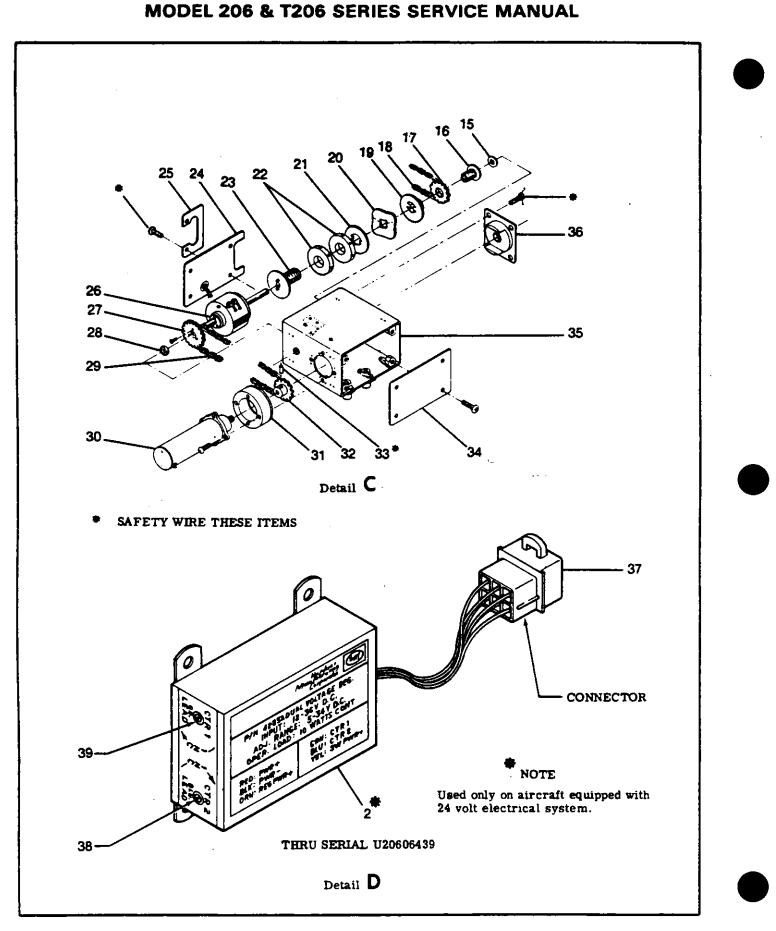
Electric Elevator Trim Assist Installation (Sheet 3 of 4)
